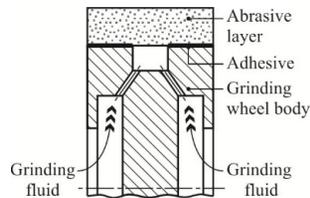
The example of the centrifugal grinding fluid provision through the channels in the grinding wheel body and grinding wheel pores [3]
